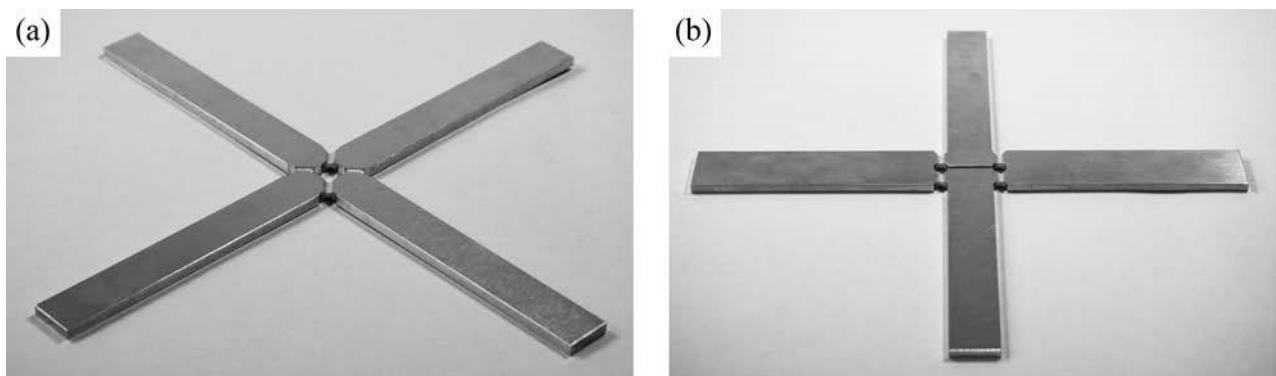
Biaxial specimens: (a) X0- and (b) H-specimen
